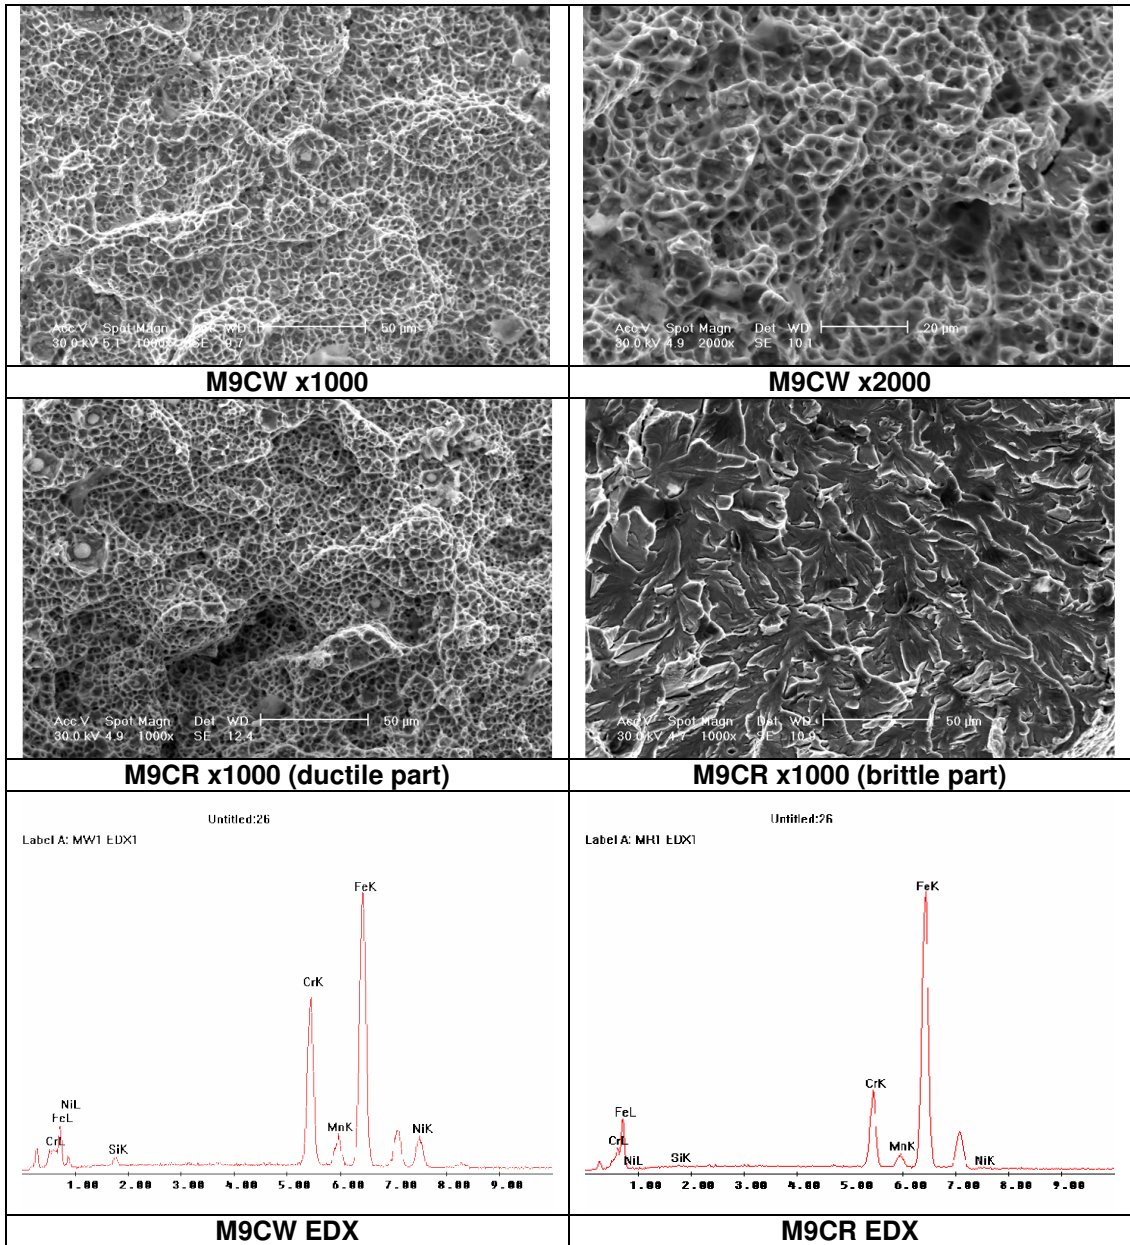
SEM images and EDX analysis of the CTOD fractographs from M9 weld.
